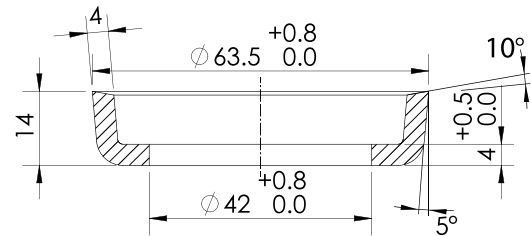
Specified cup seal dimensions (mm) (Erpf, 2007).
